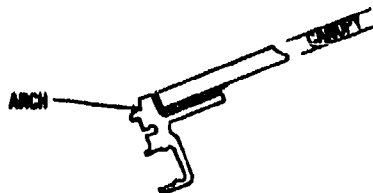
View from Side of Arch, Cross Section of Arch Structure
